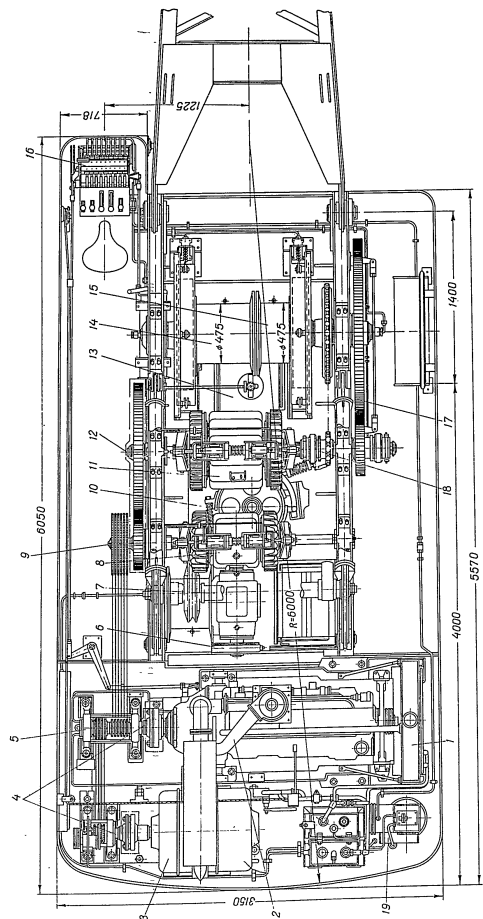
Plan of the Model K-251 Crane: 1 - radiator; 2 - generator; 3 - generator; 4 - flexible couplings; 5 - sprocket shaft; 6 - bracket; 7 - boom-lifting winch; 8 - boom-lifting winch reversing gear; 9 - transmission shaft; 10 - swinging mechanism bracket; 11 - main winch shaft; 12 - main winch shaft; 13 - auxiliary hoisting drum; 14 - main hoisting drum; 15 - auxiliary reversing gear; 16 - control panel; 17 and 18 - main winch reversing gear; 19 - accumulator
